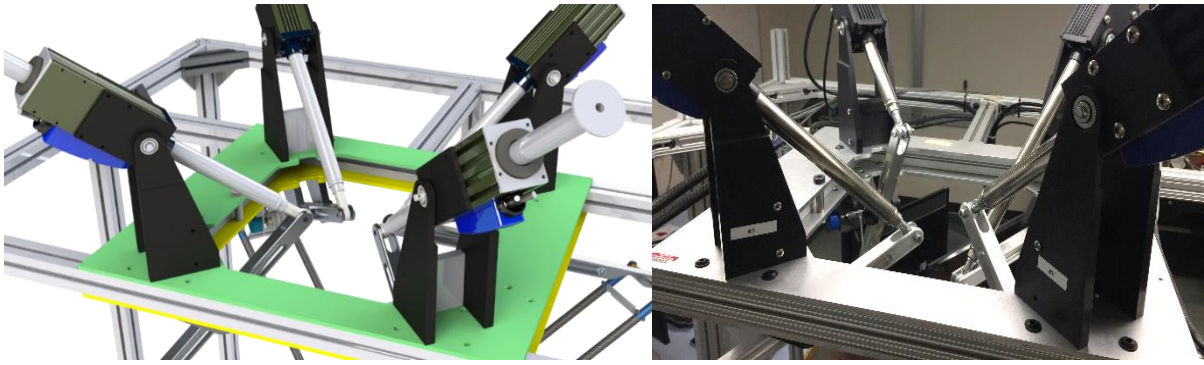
The second iteration of Mounting Plates. A shoulder bolt used for alignment of the upper and lower mounting plates can be seen on the left side of both images.
